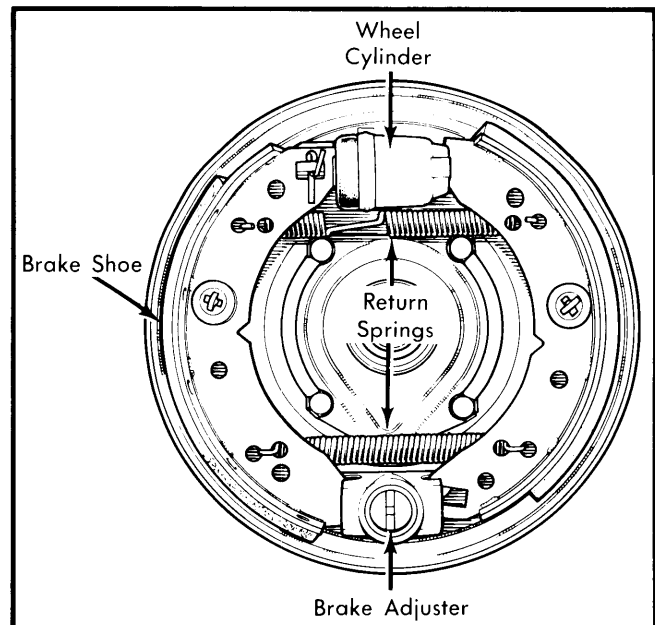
Exploded View of Spitfire Rear Brake Assembly
